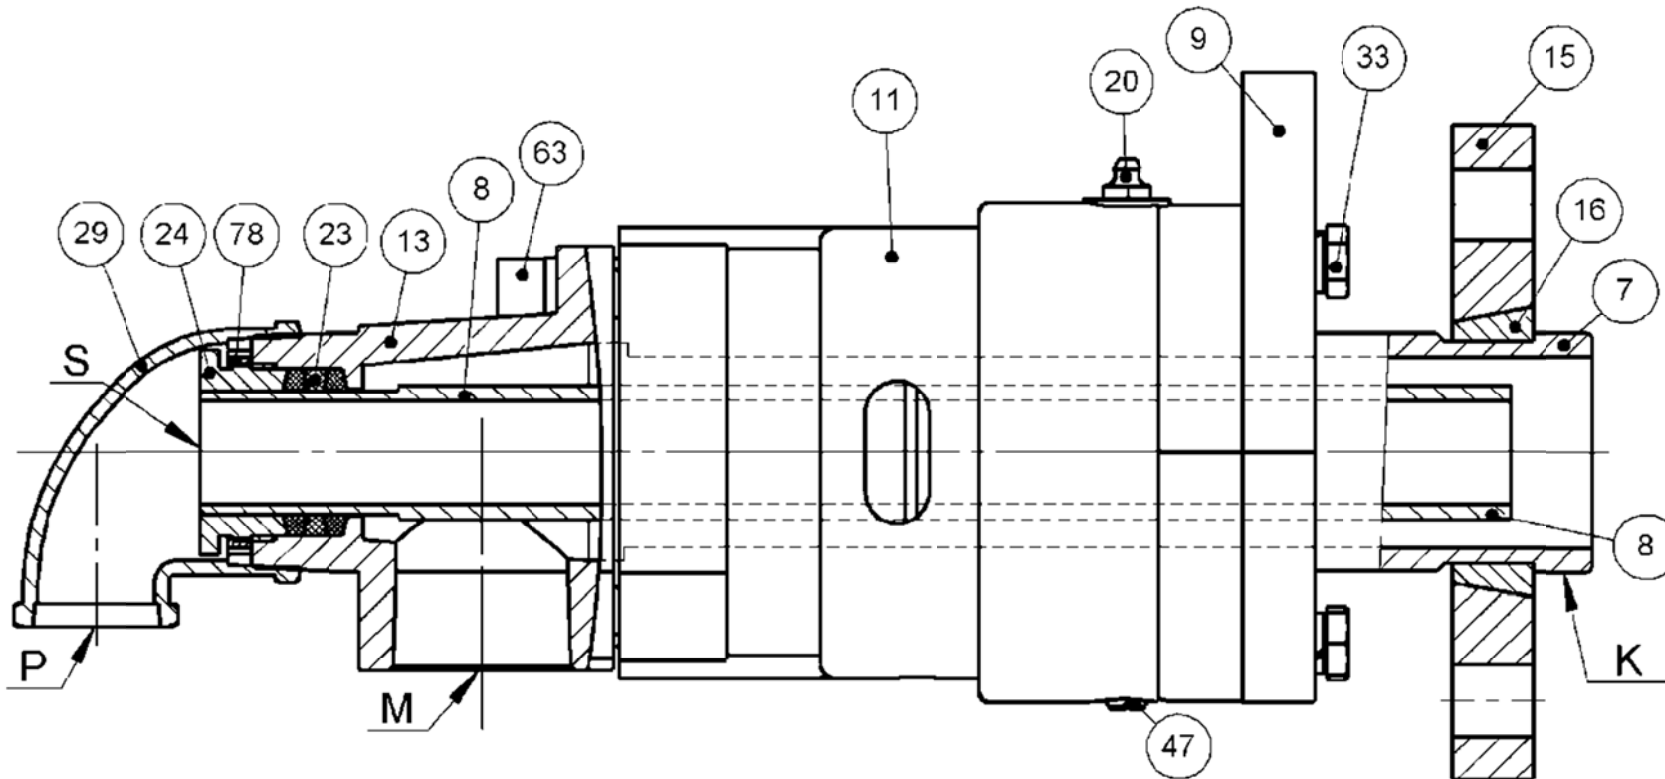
Assembly drawing for Dual Flow type WDSXF rotary joint with quick release flange
